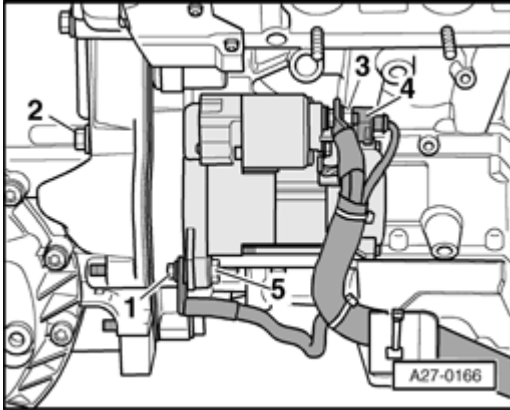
Identifying Ground (GND) Wire, Starter Electrical Wires, Bolts & Starter
